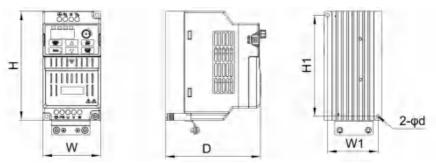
Overall dimensions of FG210-2S、2T(0.4kW~1.5kW)、FG210-4T(0.4kW~2.2kW)
